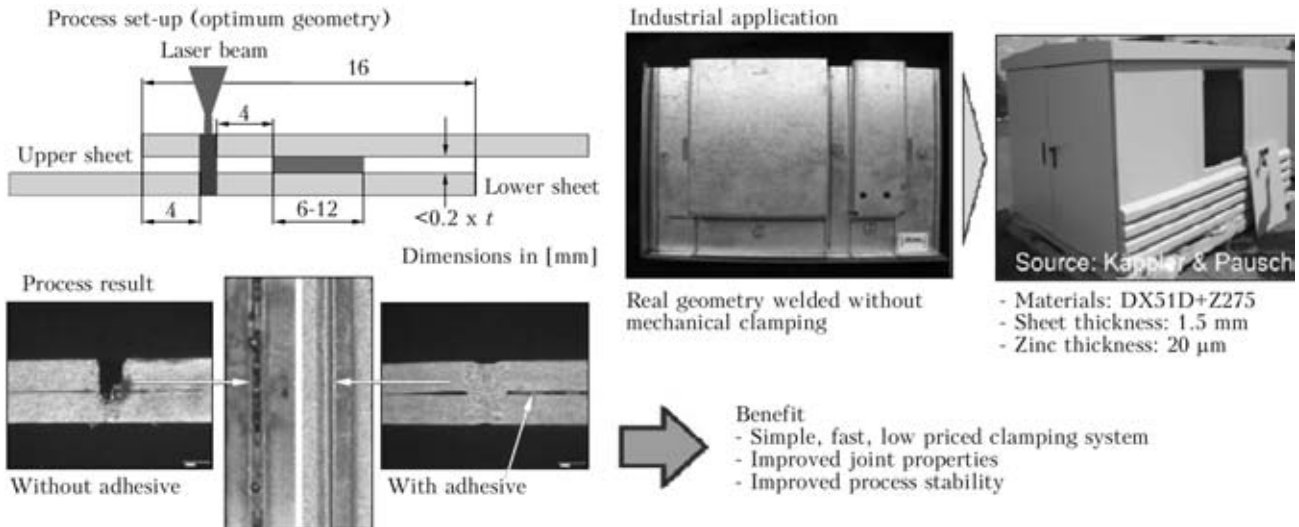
Laser beam welding combined with adhesive bonding
